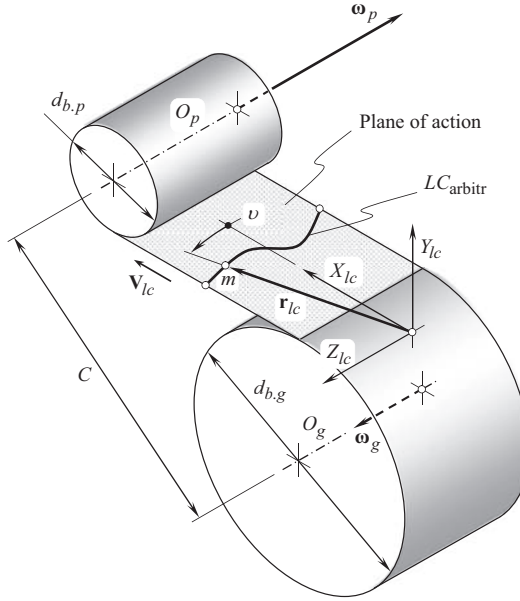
Generation of screw involute surfaces of tooth flanks,  $\mathcal{G}$  and  $\mathcal{P}$ , in a pair of helical gears.
